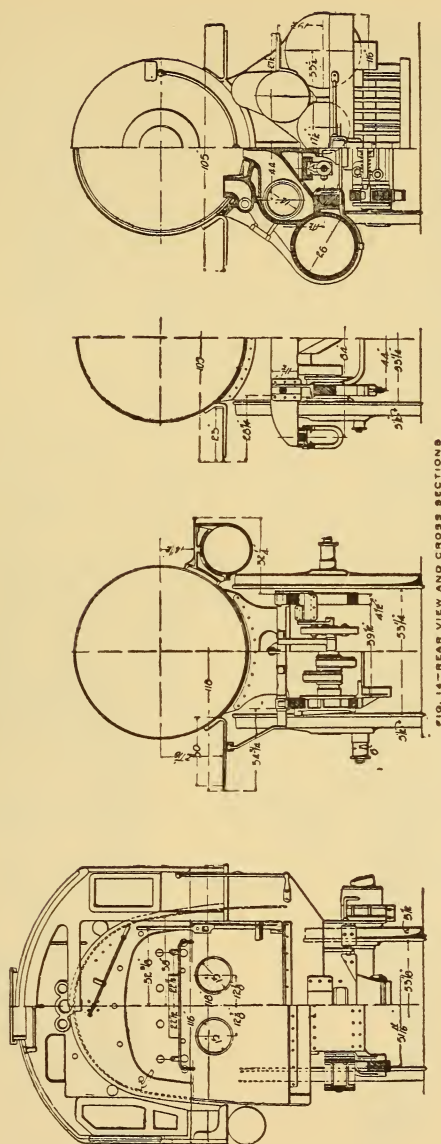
REAR VIEW AND CROSS SECTIONS
